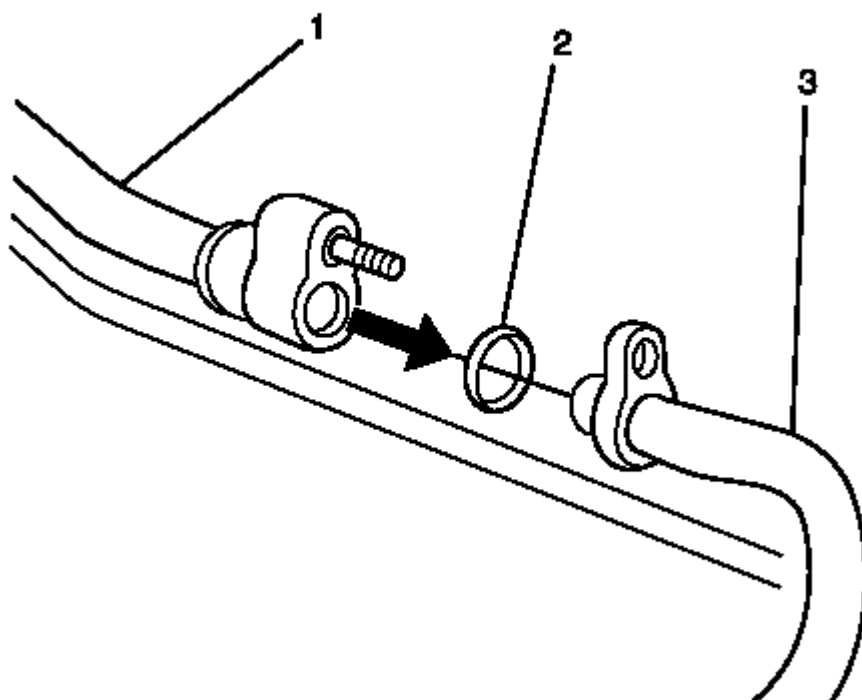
Identifying Upper & Lower A/C Suction Pipe With Sealing O-Ring
